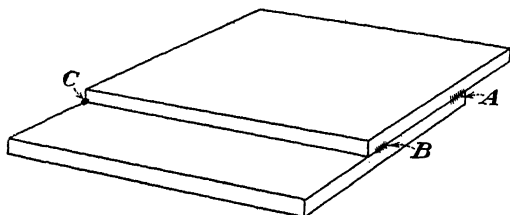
Flat lap weld. A, B, and C are tack welds.
